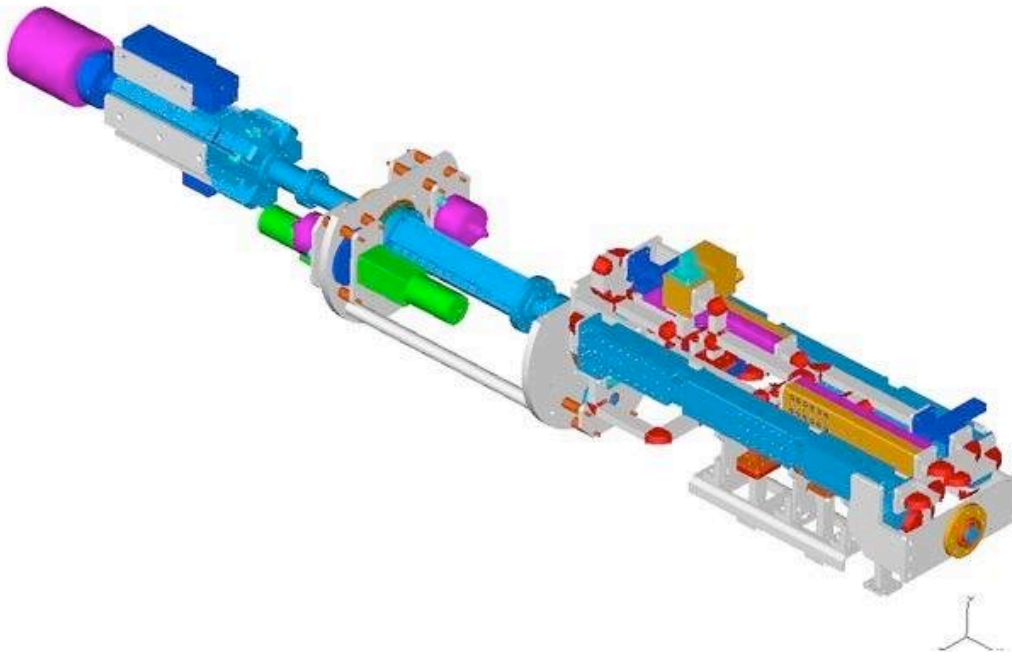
3D layout of a complete feed assembly which includes the above described Ku-band linear/circular pol. tracking system
